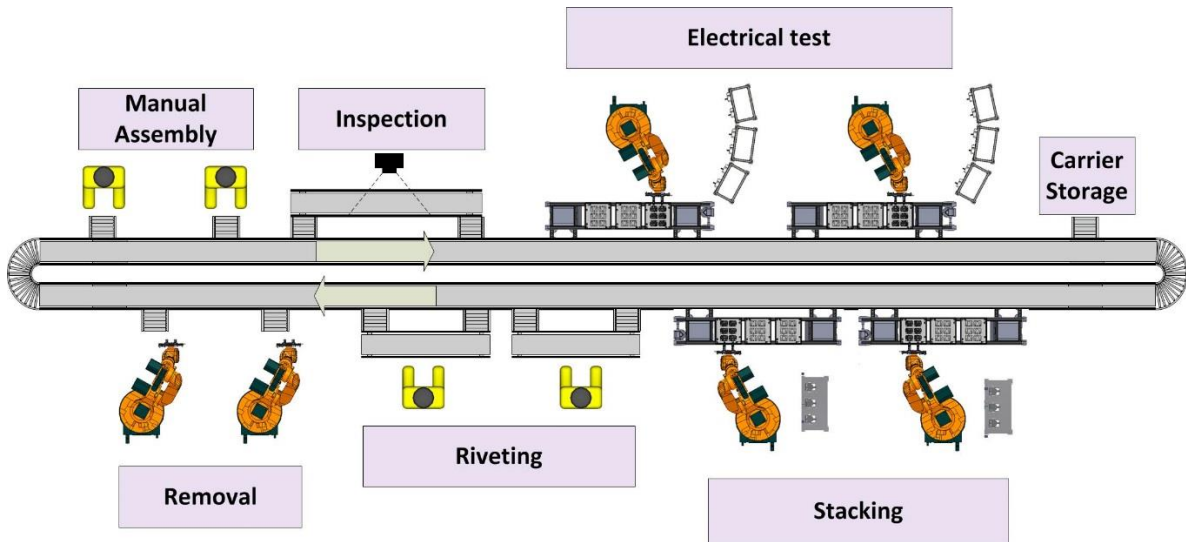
Layout of the electrical circuit breaker assembly and testing cell.
